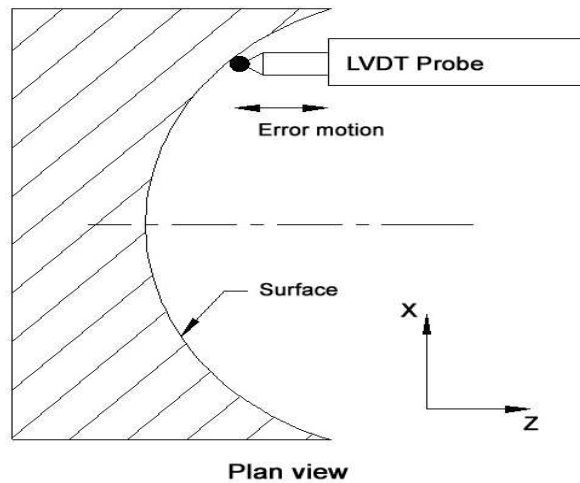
Air Bearing Type LVDT Probe for Measuring Surface Form
